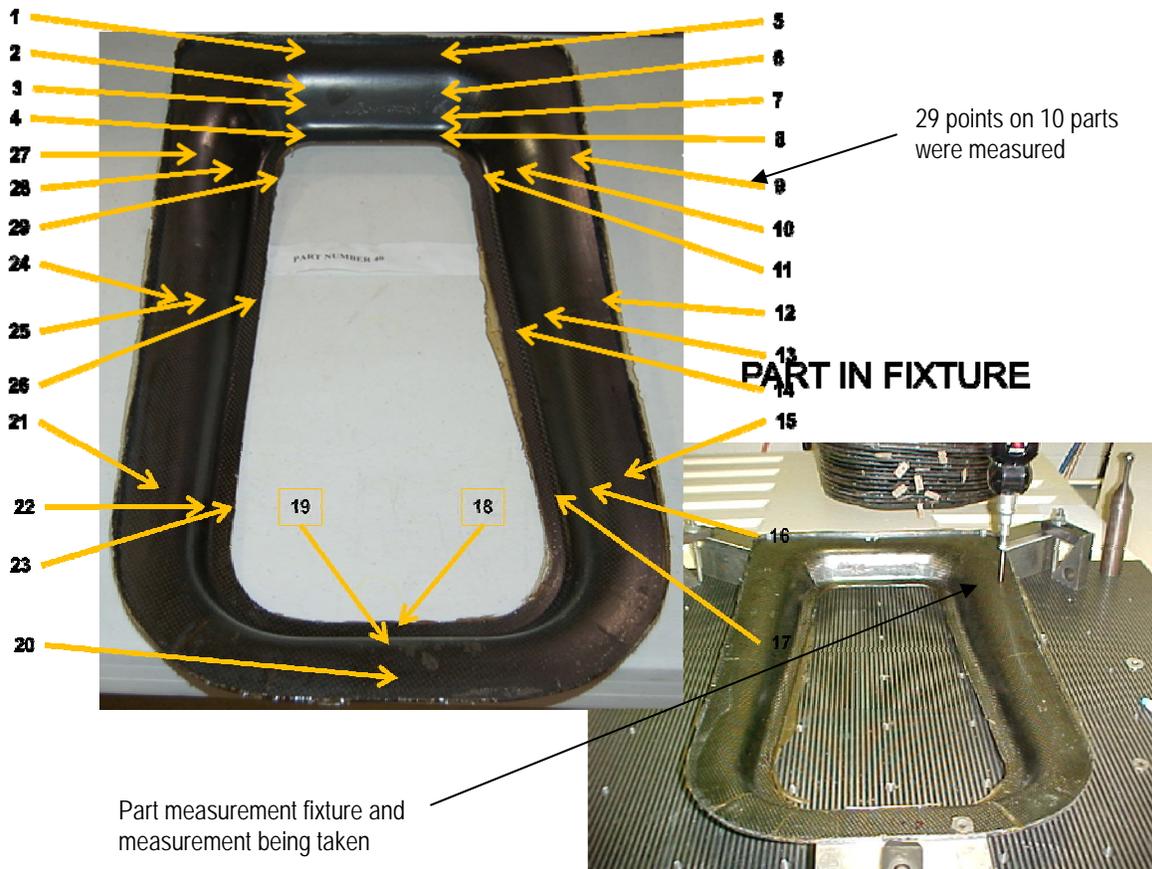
Picture on the left shows the points measured during the dimensional evaluation using a coordinate measurement machine (CMM) with a photo of the part set up shown on the right
